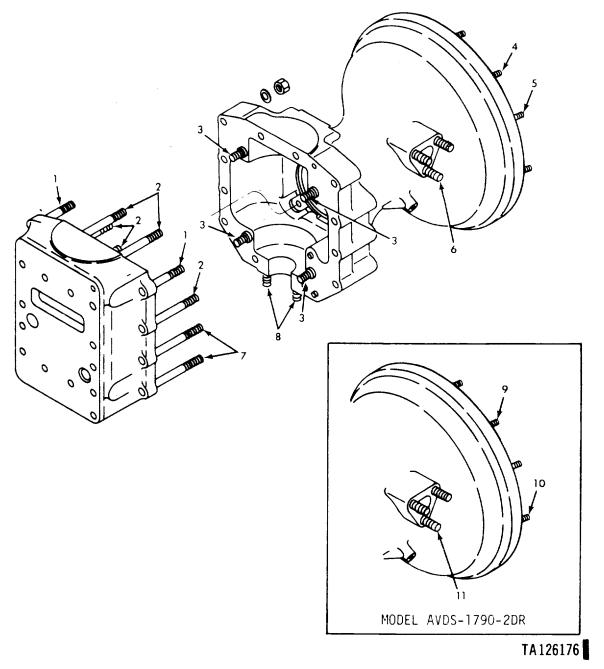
Front fan drive housing and mounting base studding assembly.
